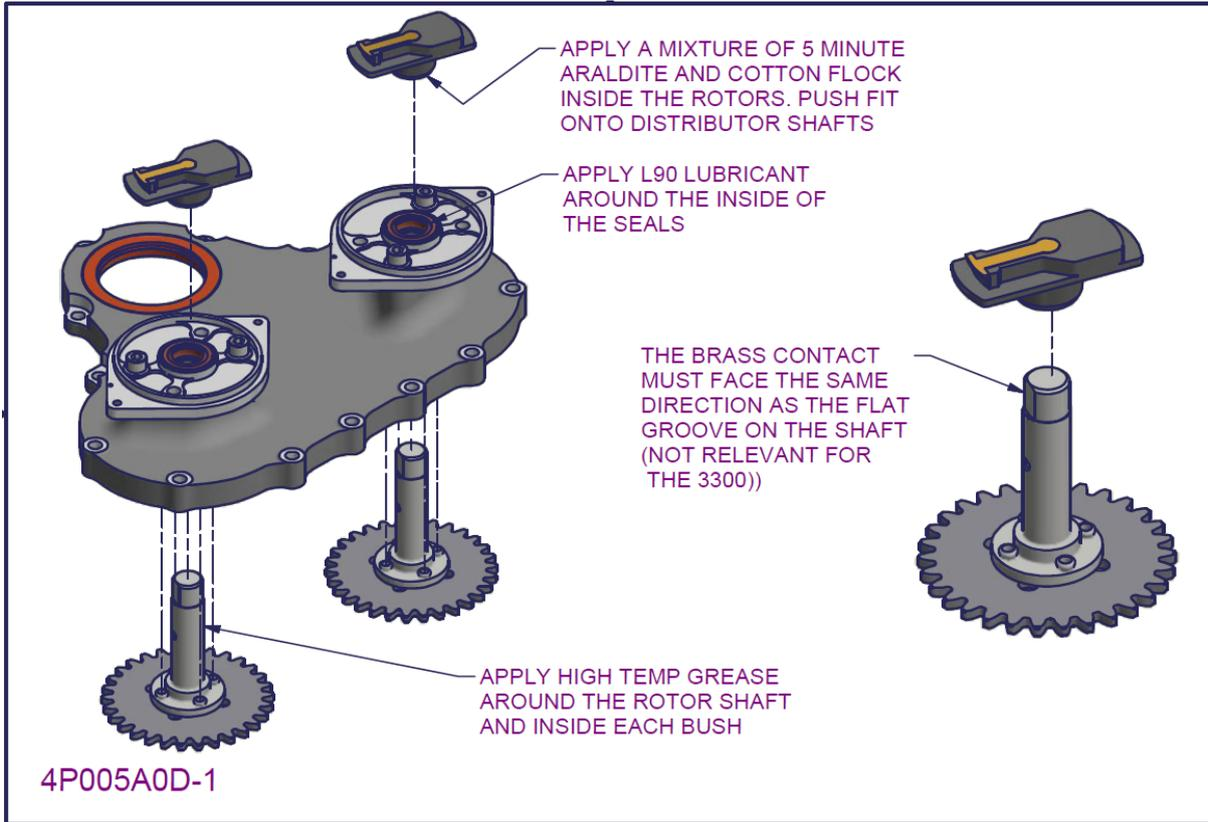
2200/3300 Distributor gearbox subassembly 5
